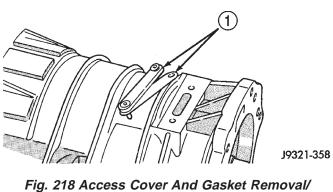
Access Cover And Gasket Removal/ Installation 1 – ACCESS COVER AND GASKET
